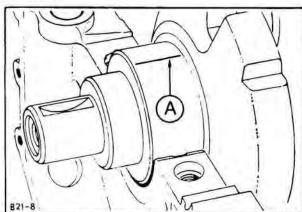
Location of Plastigage thread A - Calibrated plastic thread
